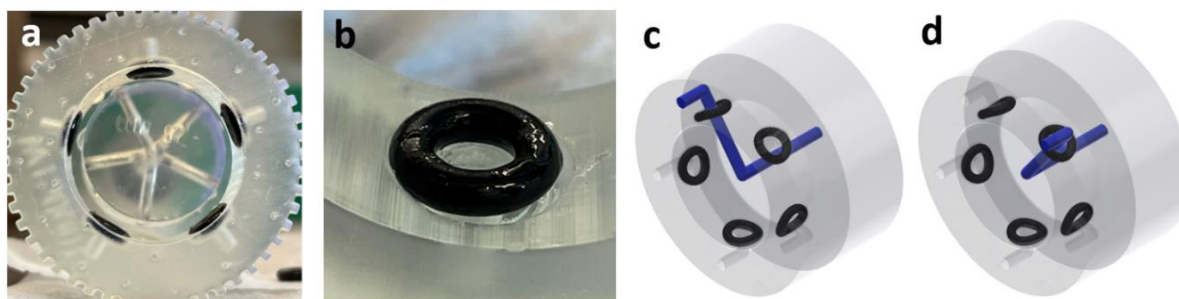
Rotary valve details. (a) End-on view of a 3D-printed rotary valve (the inner portion is removed) showing the fluidic channels and the sealing O-rings. (b) Detail view of a sealing O-ring sitting in its groove, fluid can pass through to the outer barrel when the inner portion is aligned to this O-ring. (c-d) 3D models of the fluidic pathways. In (c) the blue fluidic pathway is connected through the O-ring and to the outlet on the top of the valve, while in (d) the inner body is rotated  $72^\circ$  clockwise, so the pathway now connects through to the upper right outlet. All 5 outlets can be accessed through rotation of the inner valve body.
